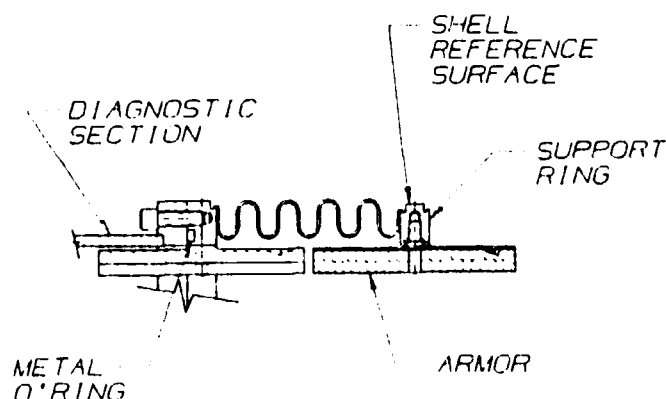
ZTH Liner Detail, Vacuum Seal Section.
